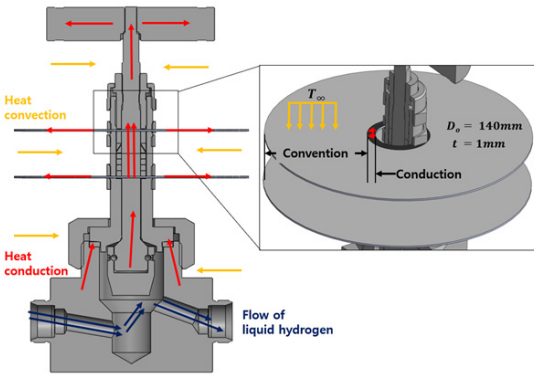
Schematics of heat transfer and detailed configuration of heat sink
